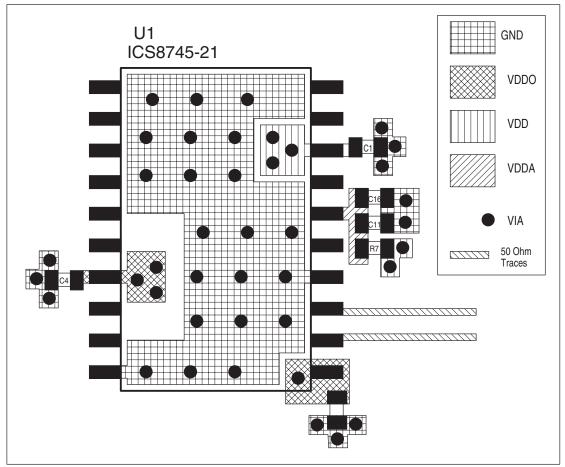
PCB BOARD LAYOUT FOR ICS8745-21
